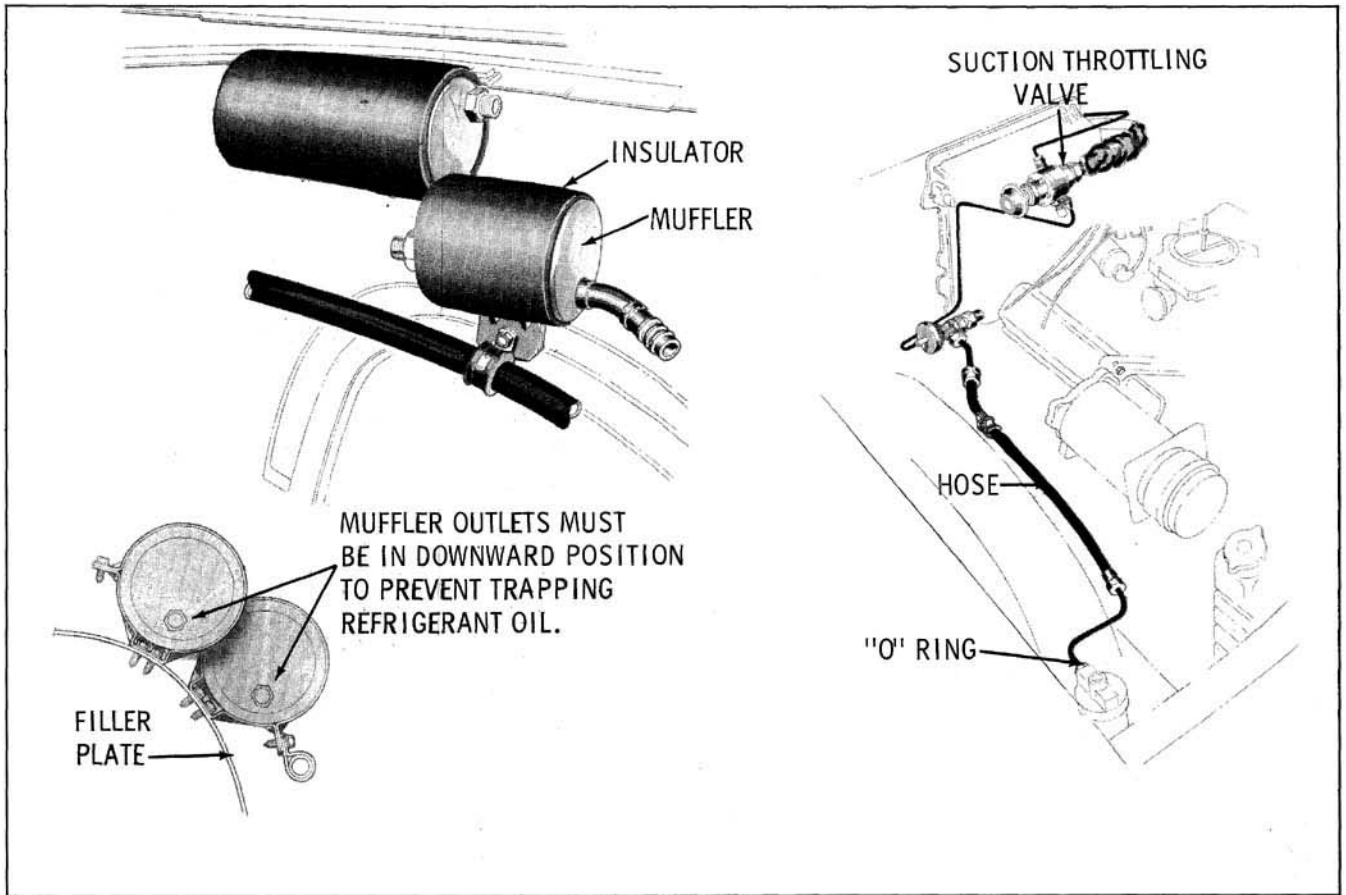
Muffler Attachment (52 through 86 Series)
